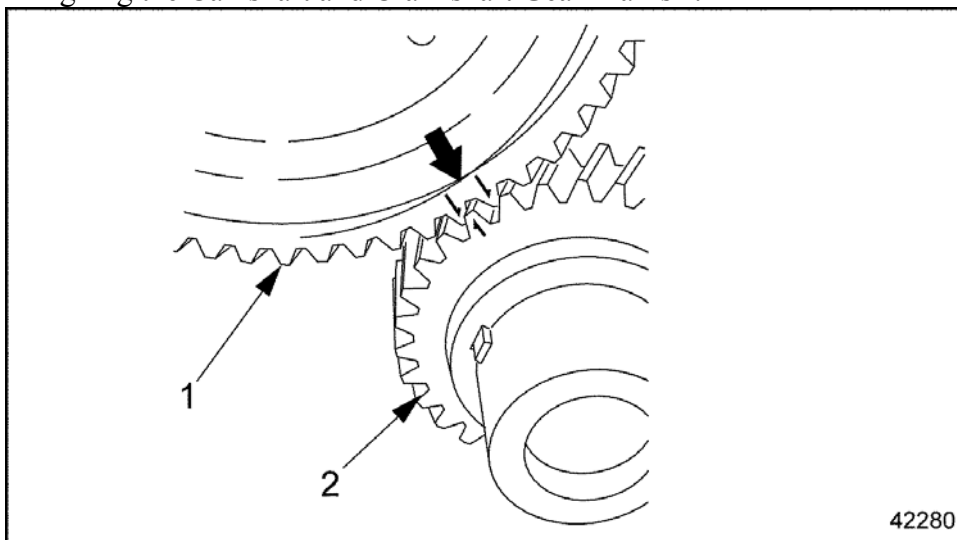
Aligning the Camshaft and Crankshaft Gear Marks
